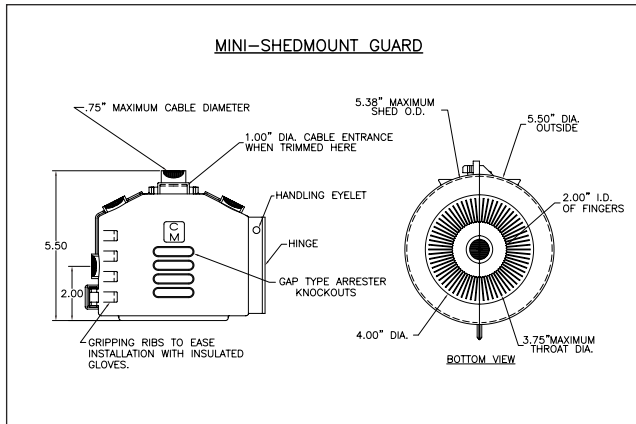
Mini-Shedmount Guard Part No. 70380340 Std. Box Count 100
